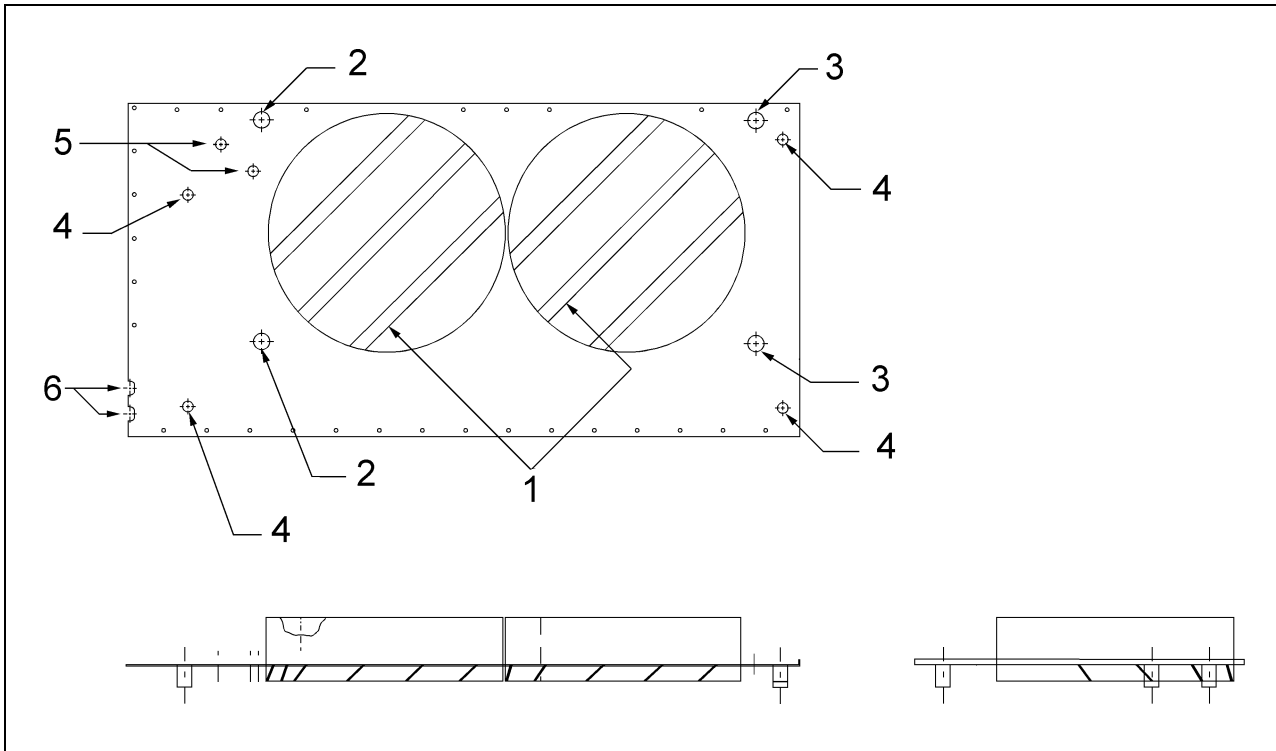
#213948 Bottom panel. (1) Cylindrical housing of fans; (2) Clearance holes for #213243 support; (3) Clearance holes for #213244 holes; (4) Evacuation hoses; (5) Clearance holes for the support of the receiver tank; (6) Holes that have to be aligned with those of #220977 reinforcement.
